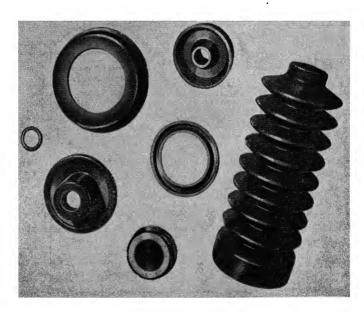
These hydraulic packing items are typical molded-rubber products. The boot at right is shaped like the lower drawing in Fig. 10.
